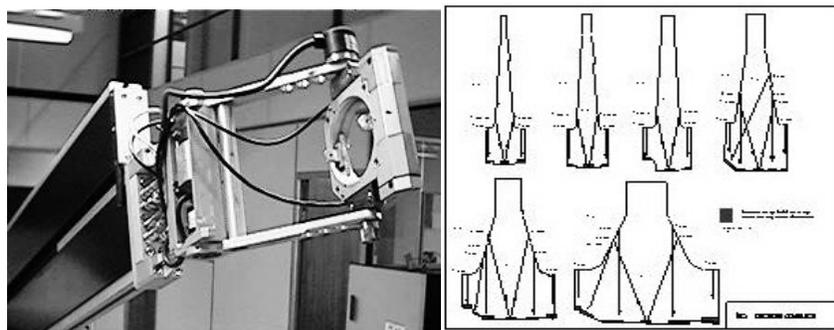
Inspection Manipulator & Fig 7 Multi angle inspection technique – probe requirements
